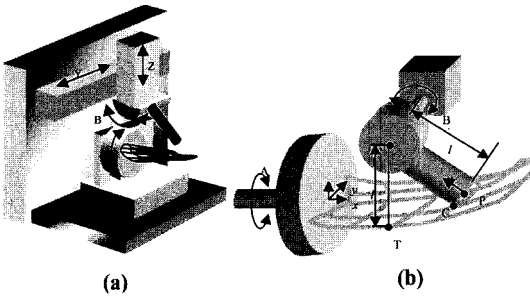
Schematic of the 5-axis milling machine for machining turbine blade. (a) coordinate system of the machine (b) geometry for inverse-kinematics.
